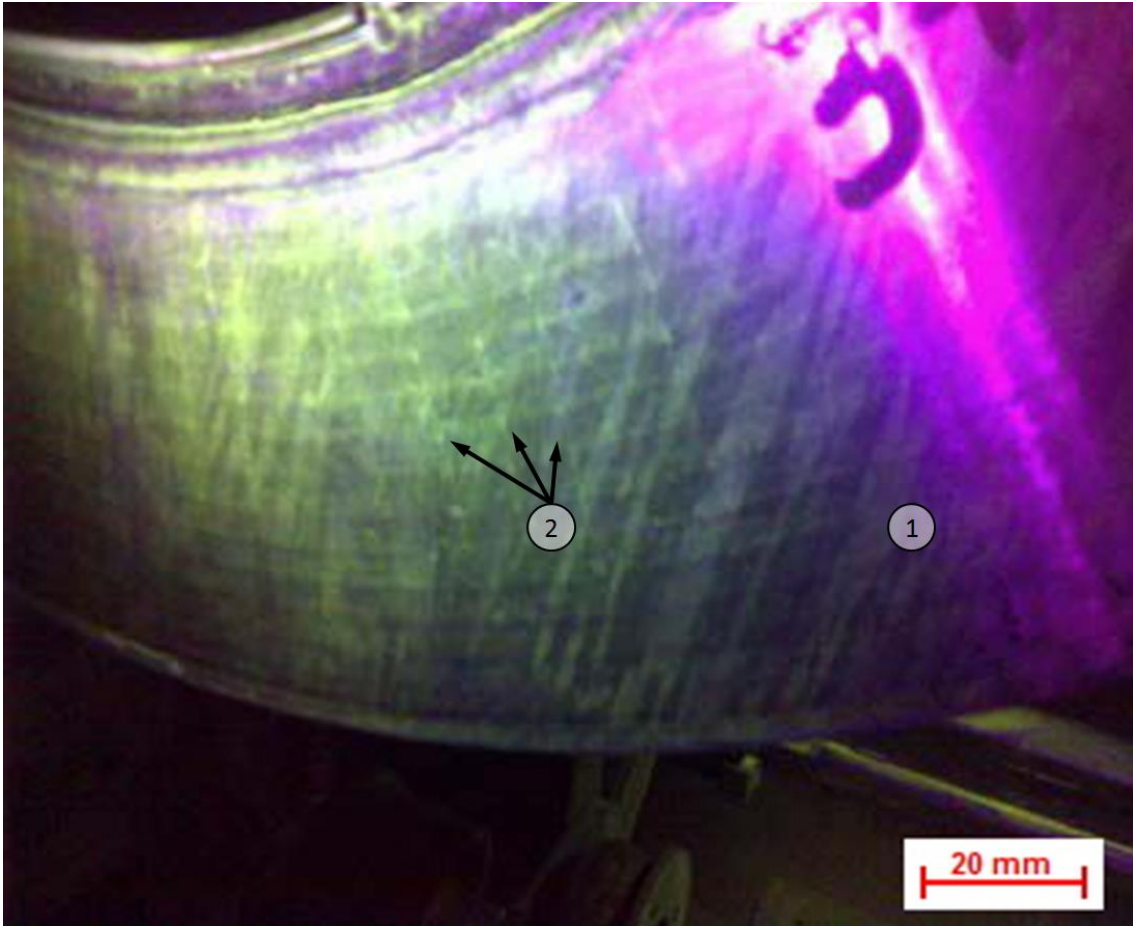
Surface crack testing on the ground 460 mm outer diameter brake disc (magnetic crack detection); 1: wear surface; 2: radial cracks
